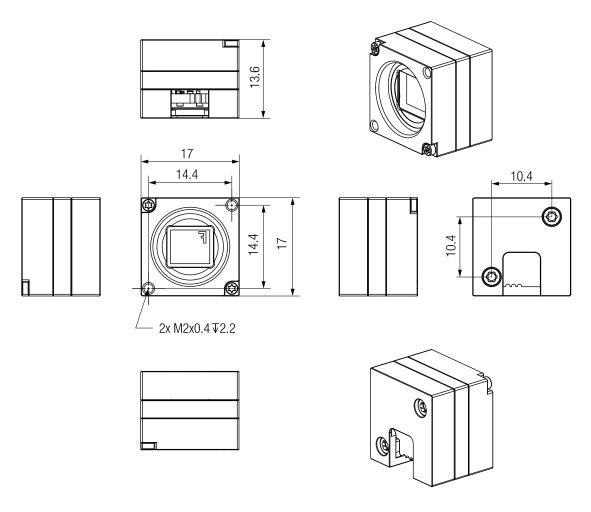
Dimensional drawing of MU051xG-SY with ADPT-MU-17x17-CX3-UC adapter
